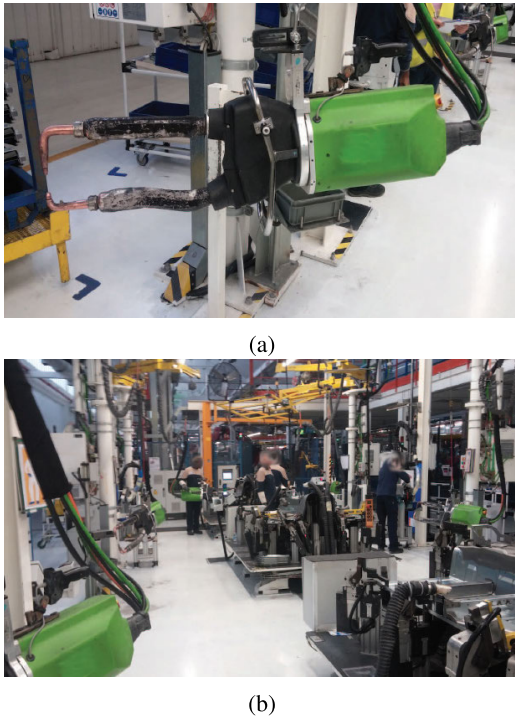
An MFDC welding gun (a) used to perform welding operations in a working area (b), taken from [31].
